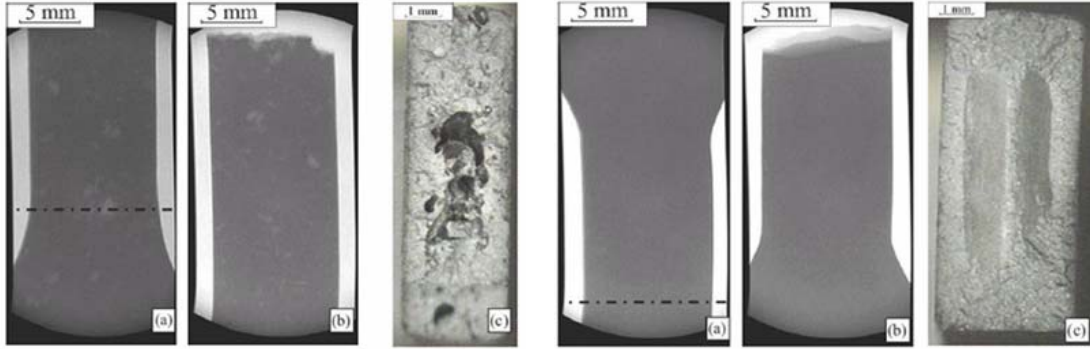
X-ray images of a tensile bar (a) before and (b) after testing; (c) fracture surface. The line in (a) represents the fracture path in the specimen. Defects were detectable by X-ray inspection.
